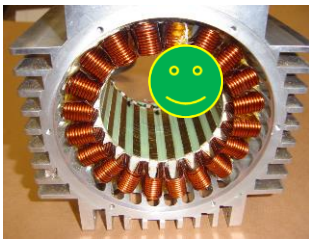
Front end of tooth concentrated winding without contact between coils of prototype 1
